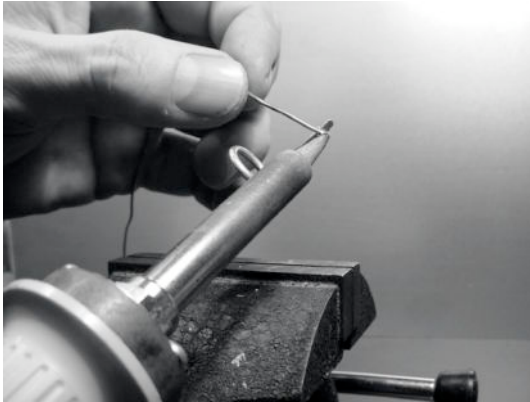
Add a little solder to the end of the wire to “tin” it prior to soldering.
